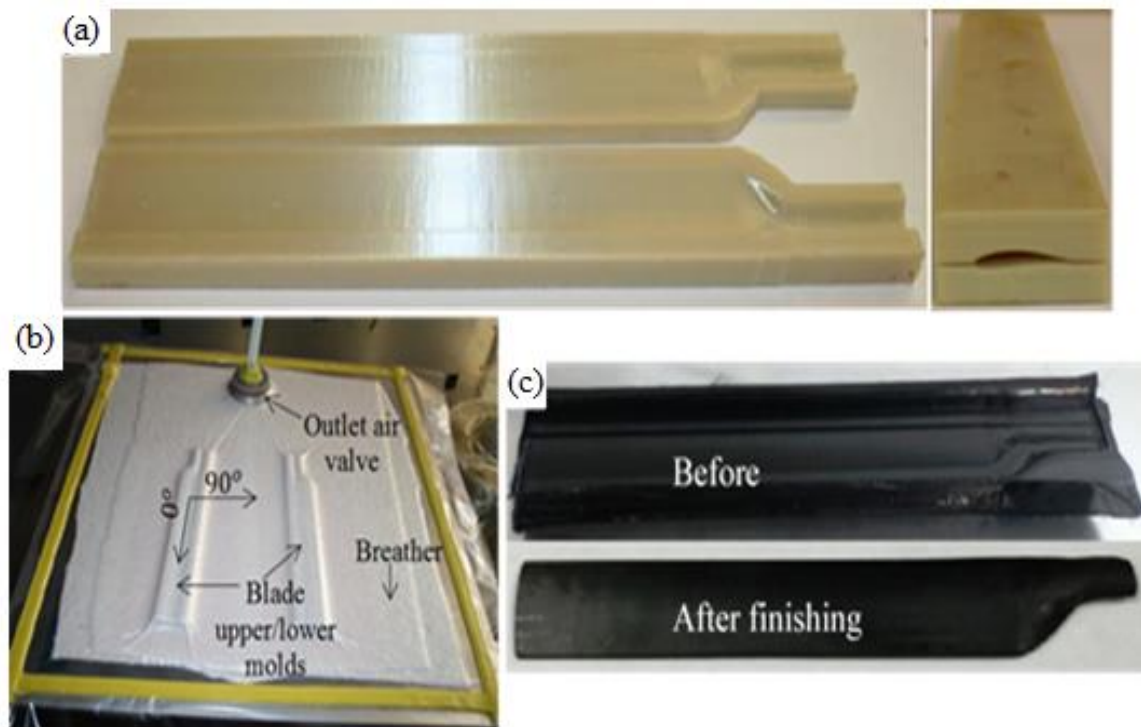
(a) Composite blade upper and lower molds, (b) out-of-autoclave technique, and (c) manufactured composite blades before and after finishing
